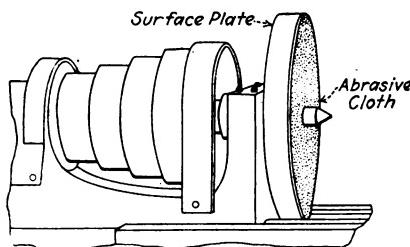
Abrasive cloth mounted on a lathe face plate
